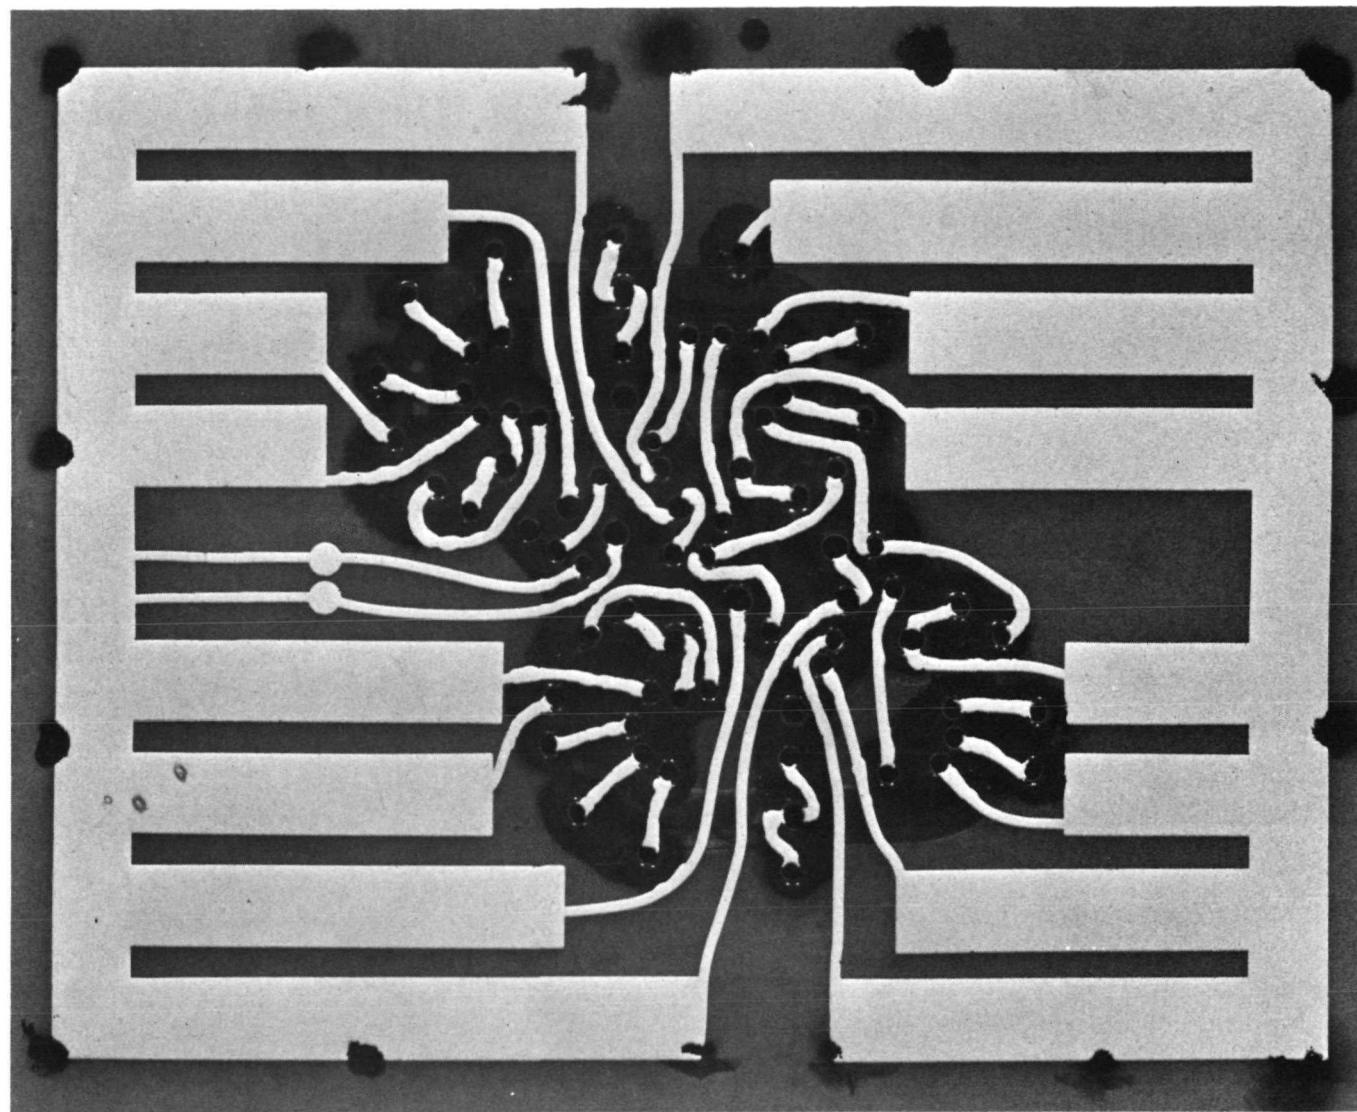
Photograph of Single Stage Circuit With Plated Drive Conductors: Bottom View
